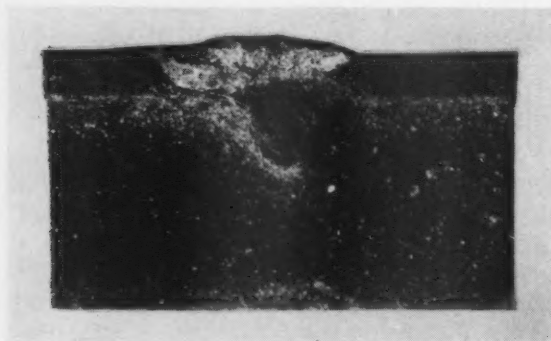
CASTING SHOWING "SCAB" DEFECT.
